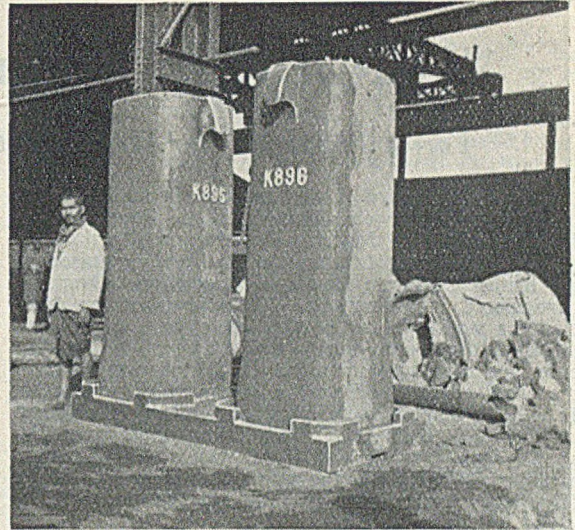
FINISHED INGOT MOULDS AND INGOT BASE CASTINGS.
